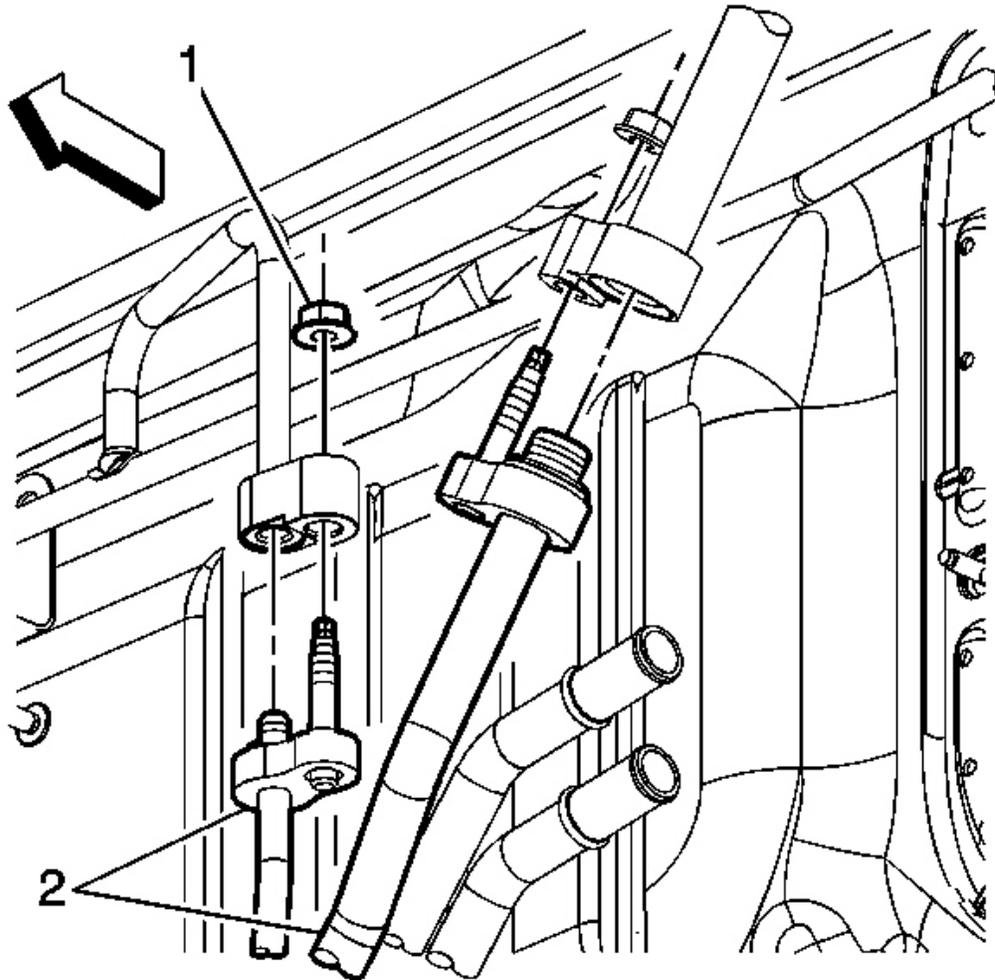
View Of Auxiliary A/C Evaporator Tubes & Retaining Nuts
